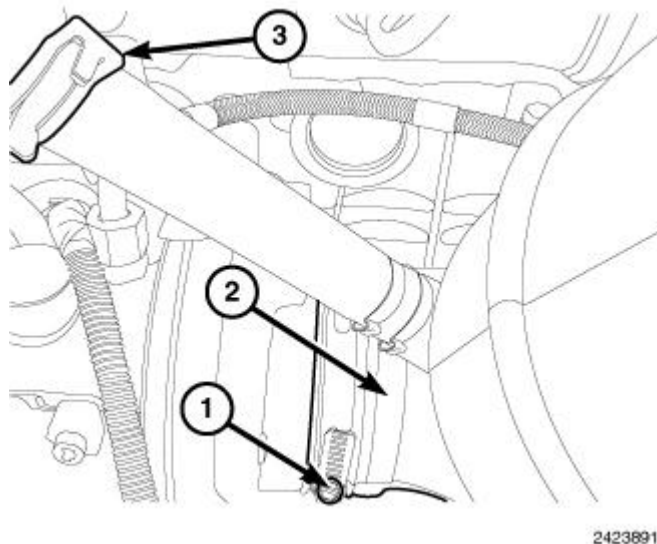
Breather Hose & Turbocharger Outlet Tube
